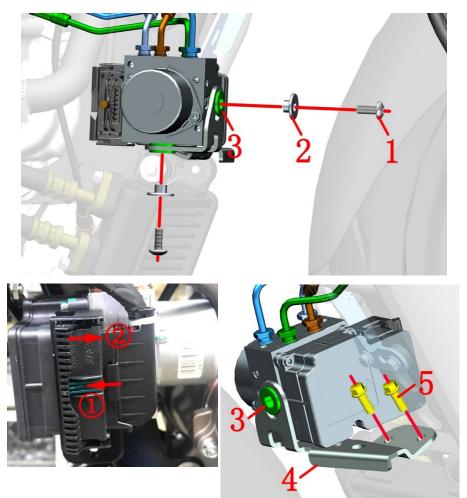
FRONT FORK COMPONENT		ABS brake system-A 1	CHK
